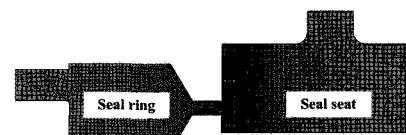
Double sealing unit with seal ring and seal seat for contact type sealing
